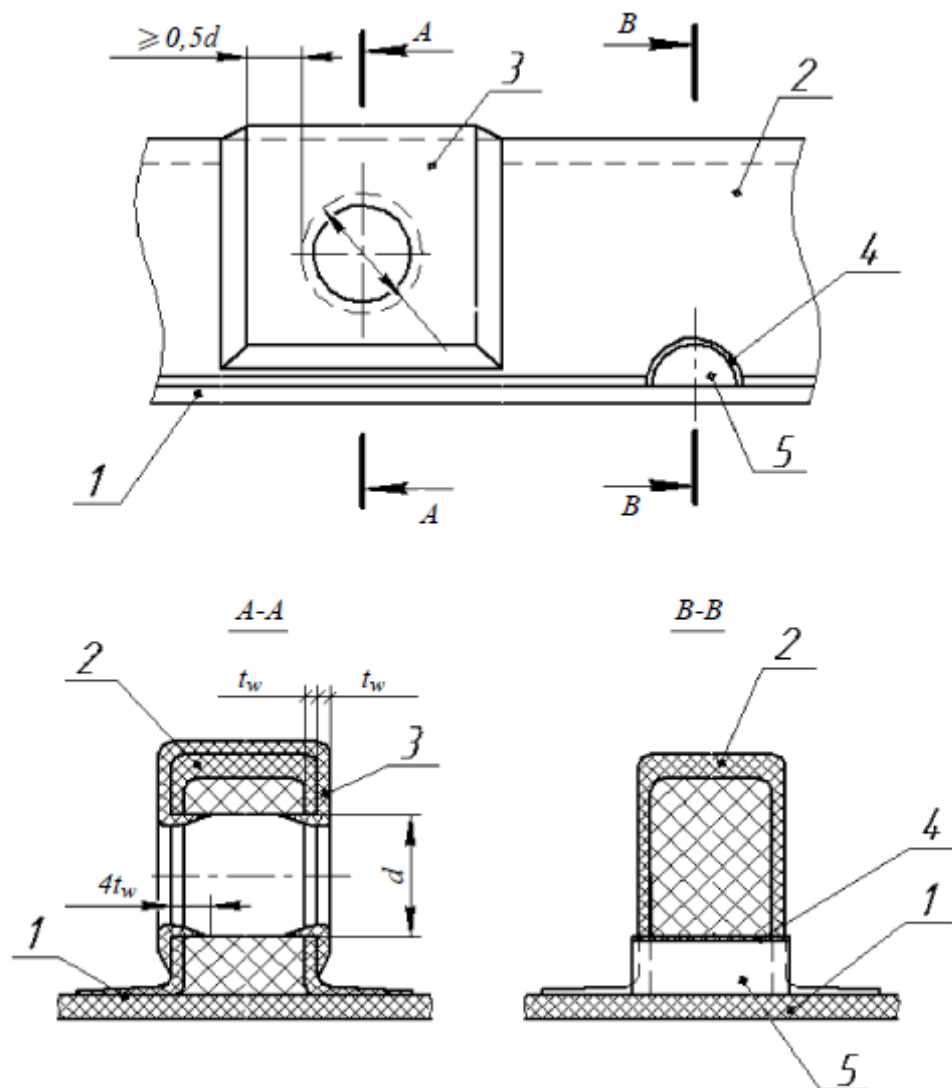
Reinforcement of openings in closed box sections of the framing members
